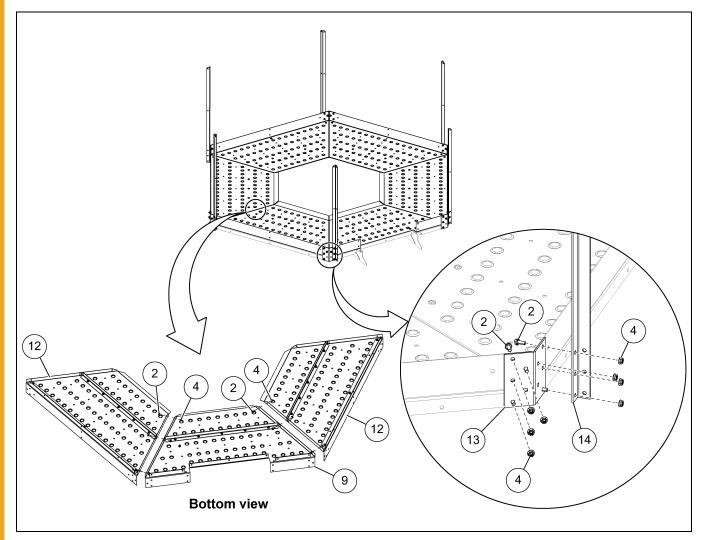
J Installing the Tie Angles and Corner Handrail Posts
